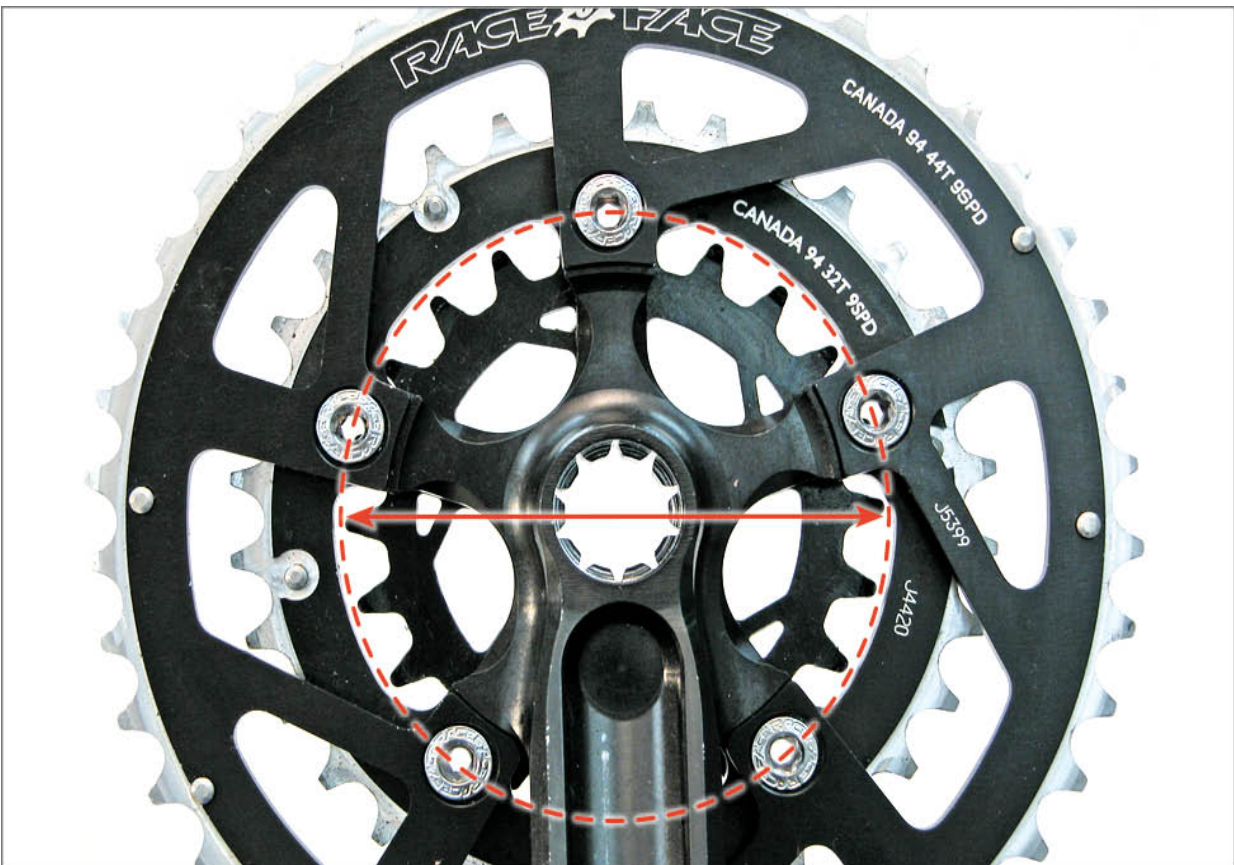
Bolt circle diameter of a five-arm crank
